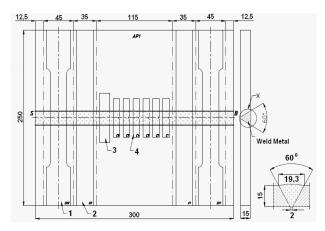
The plan of cutting for mechanical tests; tensile samples (1), bending samples (2), macro and micrography samples (3) and Charpy V-Notch samples (4).
